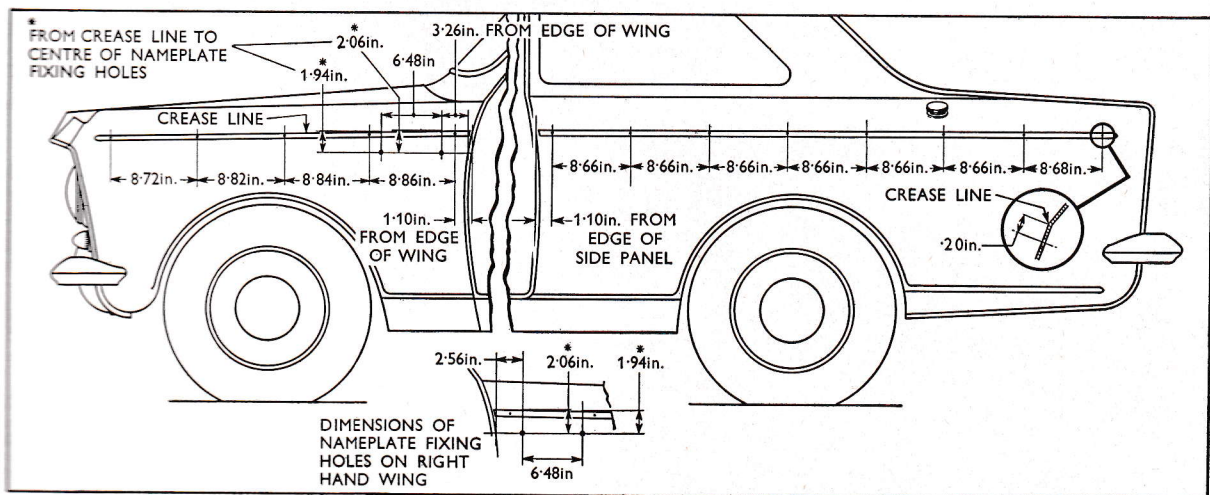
Dimensions of the front wing and body side panel moulding attaching clip fixing holes (HAD). Inset shows a part section of the side panel. The holes should be drilled with a No. 31 drill
